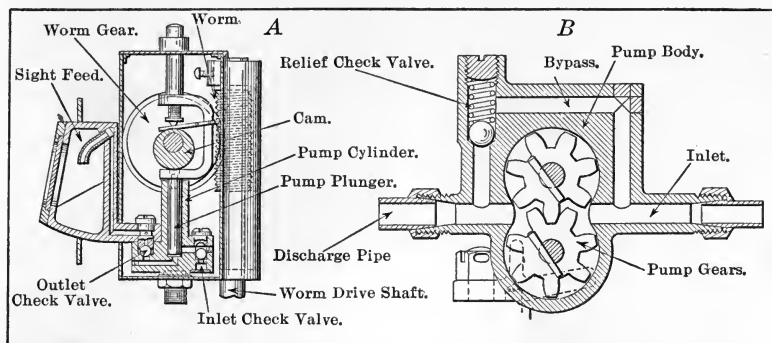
Positive Mechanical Methods of Supplying Lubricant. A—Worm Gear Driven Plunger Pump Oiler. B—Gear Pump with High-Pressure Relief Valve.
